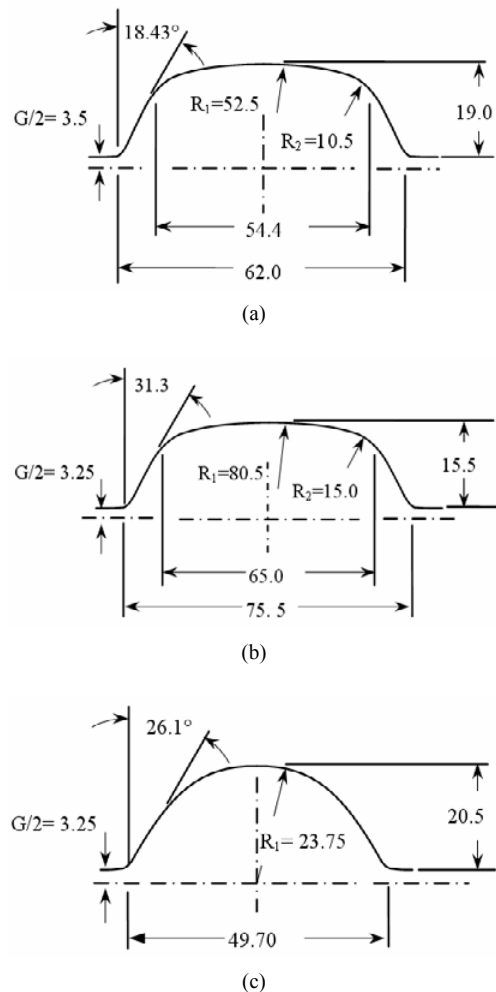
Design parameters and roll groove used in groove rolling test. 2-R oval groove (A) (b) 2-R oval groove (B) and (c) round groove.
